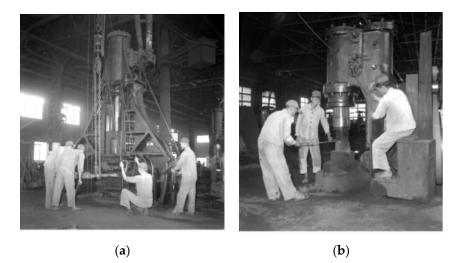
Forging (1956). (a) Two-ton steam hammer (A45) [2], (b) one-ton steam hammer (A32) [2].
